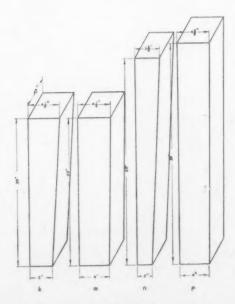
DIMENSIONS OF TEST SPECIMENS CAST VERTICALLY.
